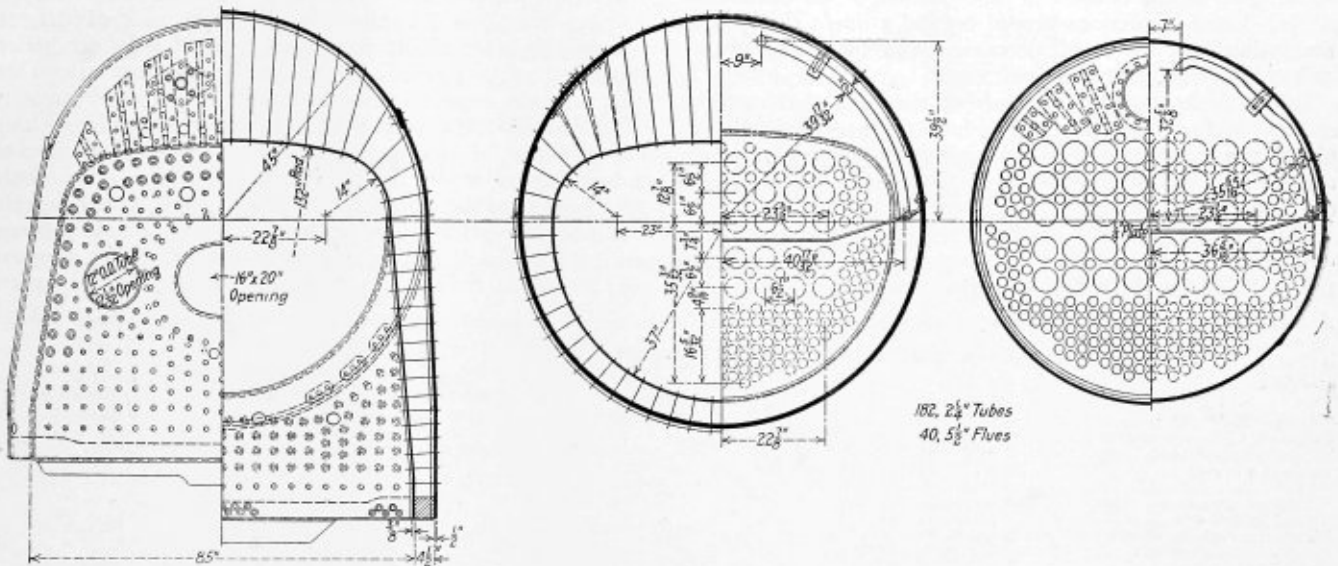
Sections of Mountain Type Boiler, Indicating Method of Attaching Circulating Plate to Shell
